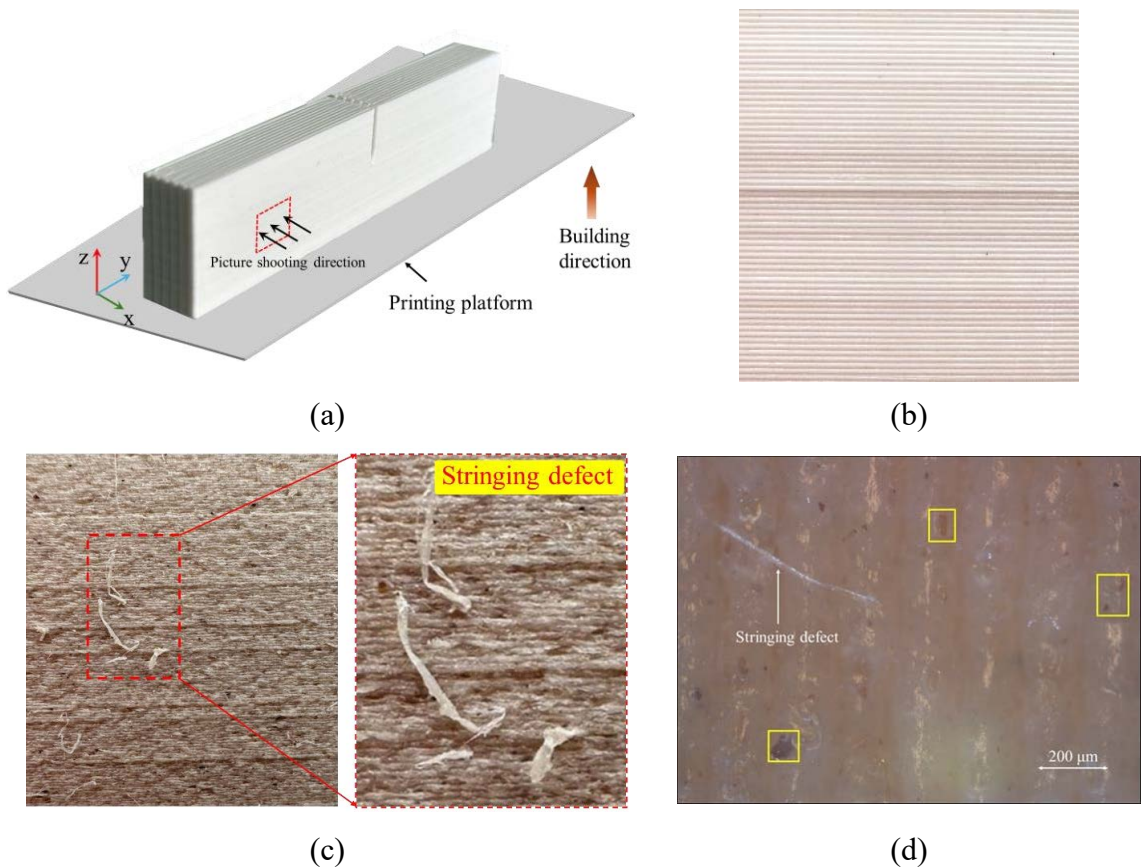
(a) Schematic of the SENB specimen with the red frame indicating the observed region, (b) the surface of PLA and (c) wood-PLA SENB specimen, and (d) surface morphology of wood-PLA SENB specimen under an optical microscope.
